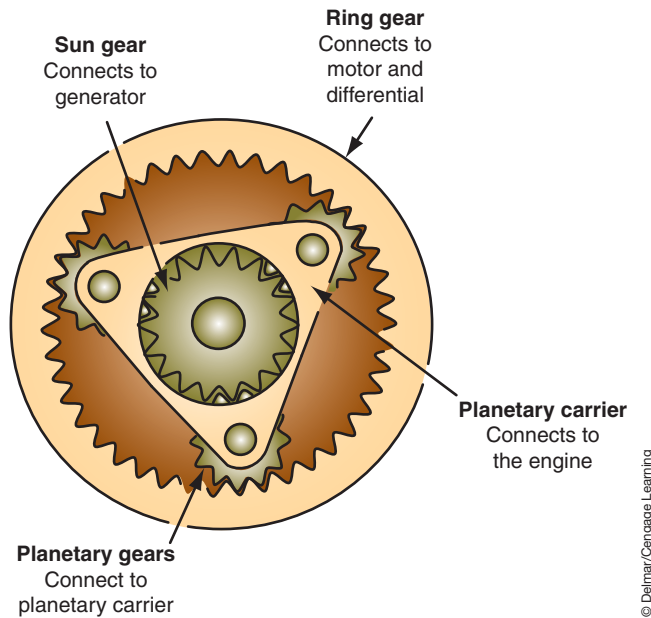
Planetary gears are used to transfer power to the drive wheels.
